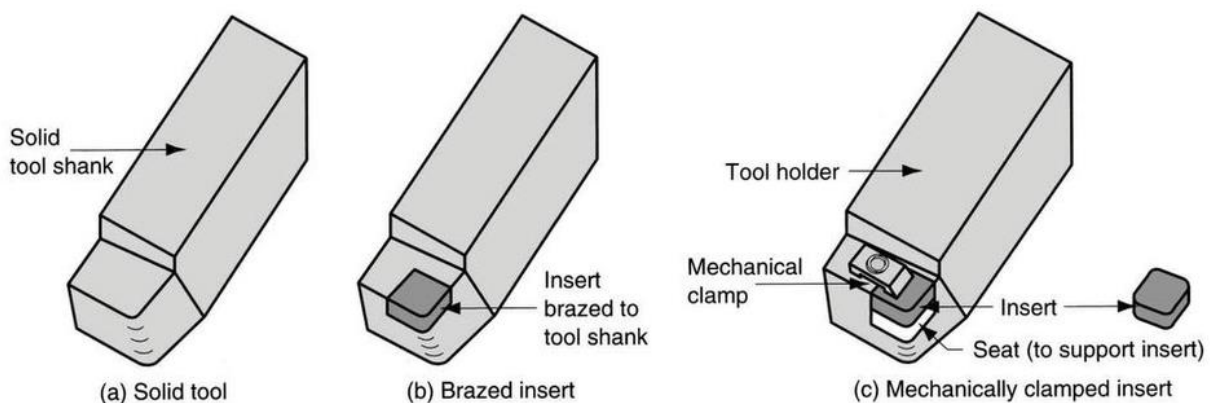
Illustration showing a) a Solid Type b) a Brazed insert tool and c) a Mechanically clamped insert.
